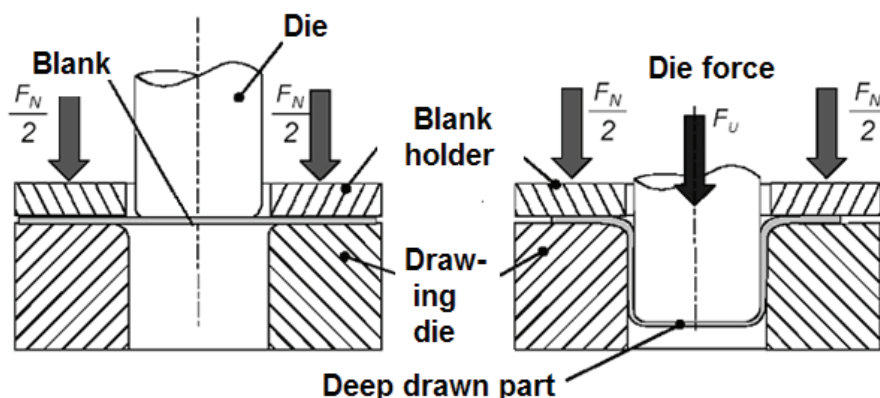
Principal design of a drawing tool (Schmidt-Jürgensen, 2002)
